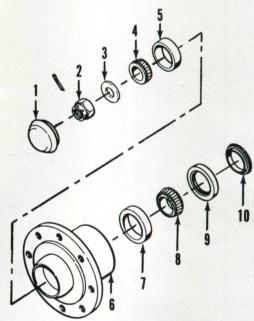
Exploded view of wheel hub and bearing assembly used on all two-wheel drive tractors.
